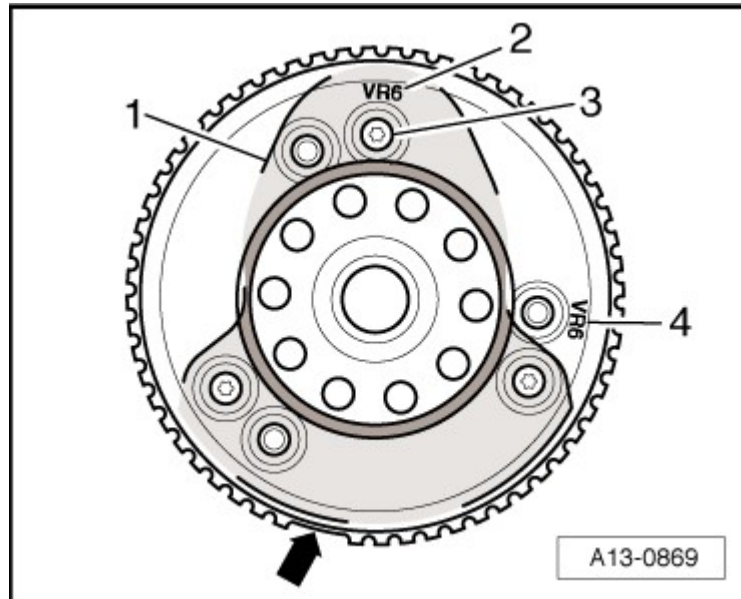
Identifying "VR6" Marking Positioned At Bore Of Bolt That Goes Into Crankshaft Crankpin
